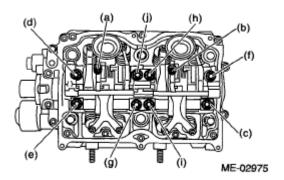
Identifying Valve Rocker Assembly Bolts Remove Sequence Courtesy of SUBARU OF AMERICA, INC.
